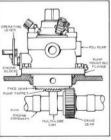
INJECTION PUMP TO CAMSHAFT RELATIONSHIP
